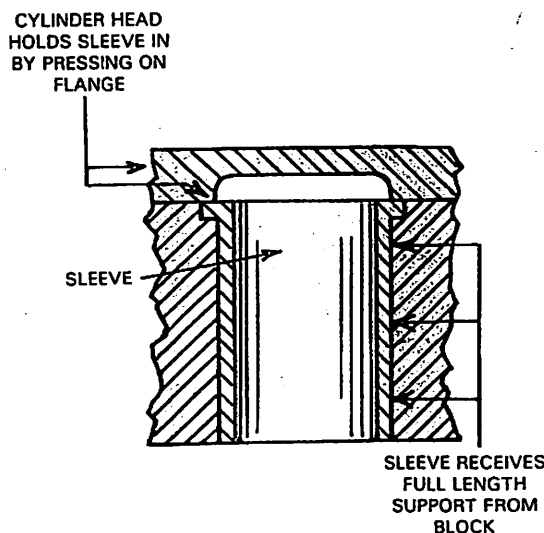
"Dry" sleeve in place in cylinder hole.
